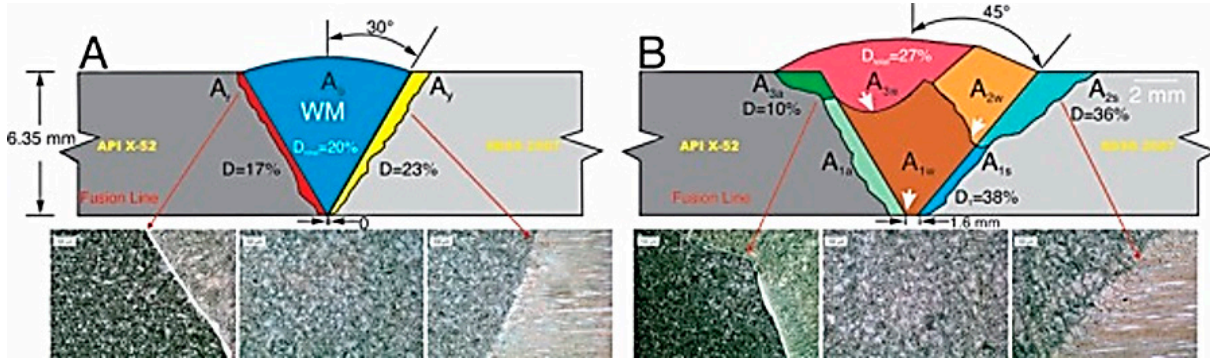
A) DMW-30 single-pass welding, B) DMW-45 multipass welding.
